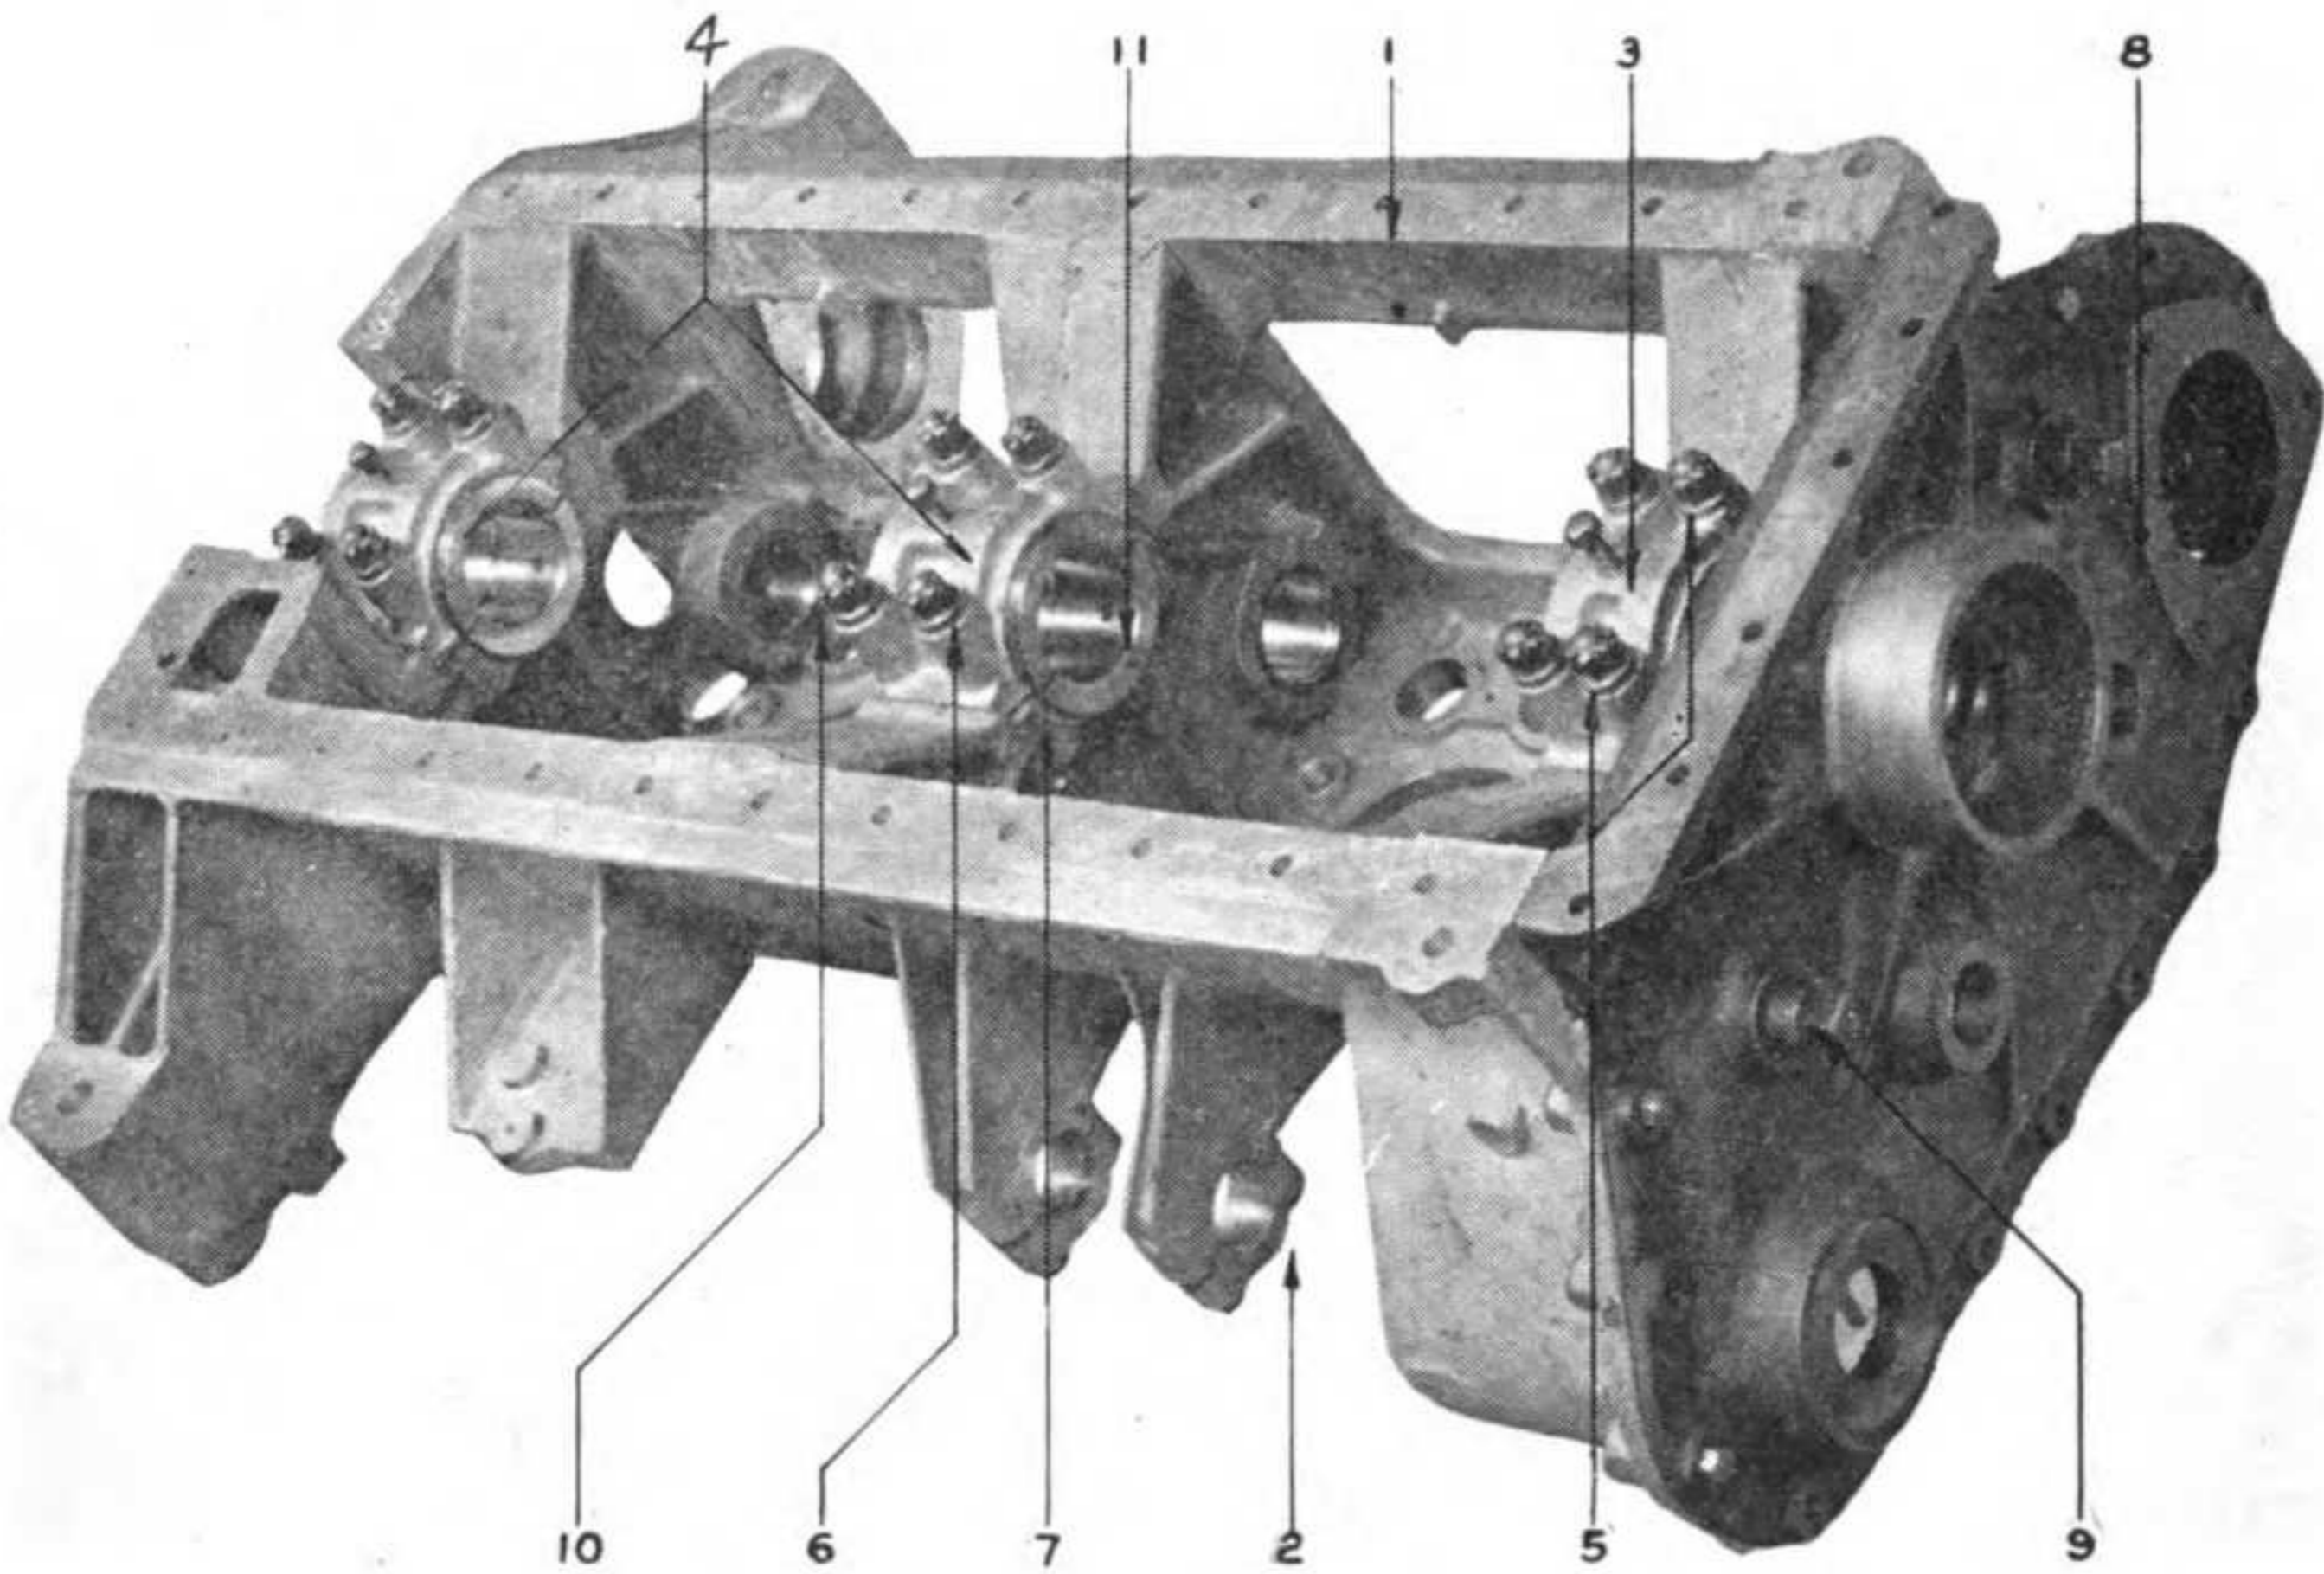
CRANK CASE ASSEMBLY, UPPER
